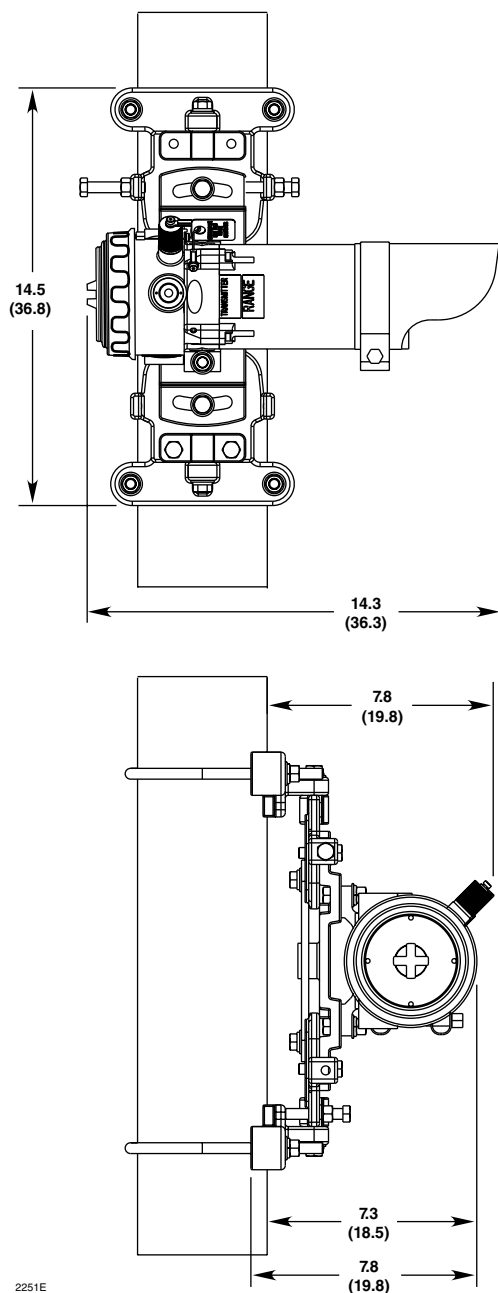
A—Mounted Dimensions of OPECL in Inches (cm)
